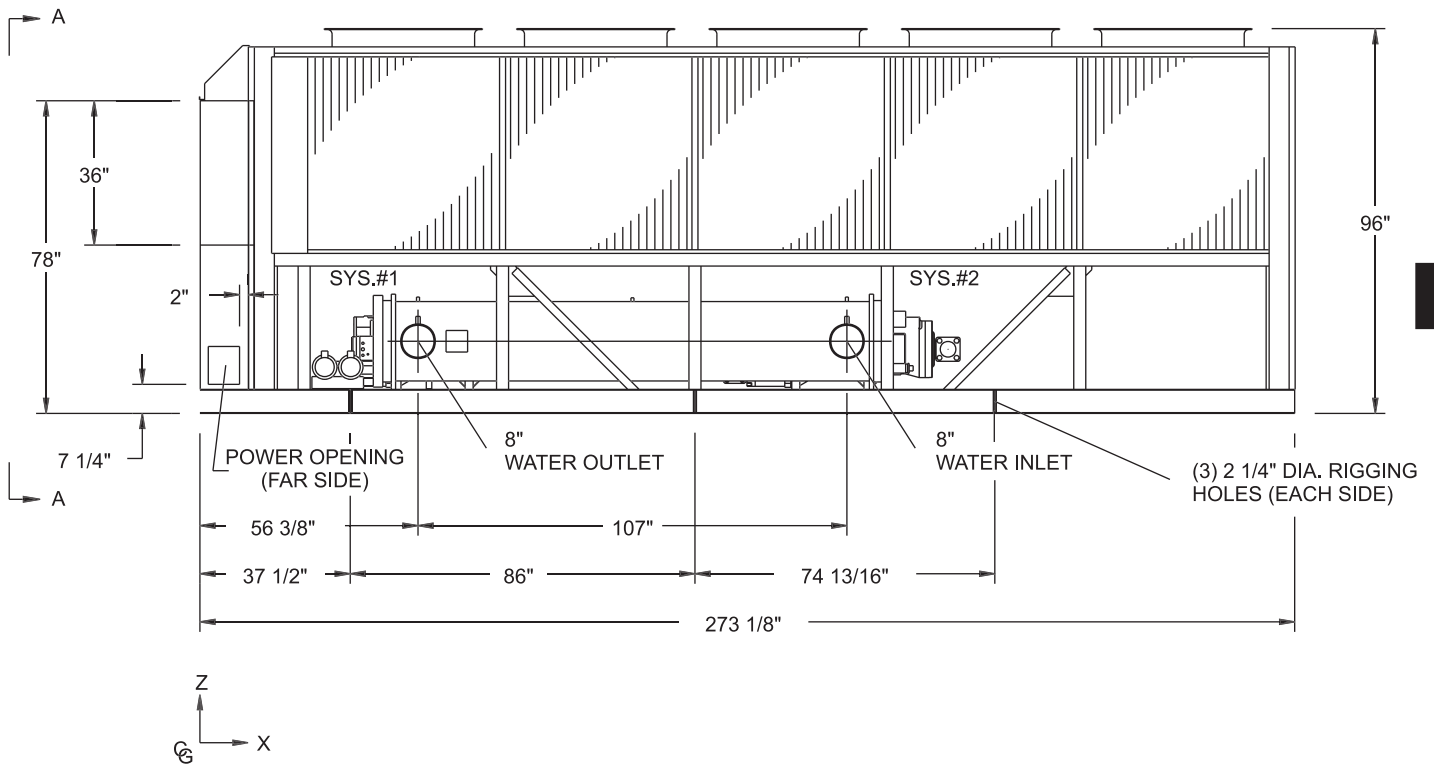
MODEL 0200 - 0230 DIMENSIONS (ENGLISH DIMENSIONS)
